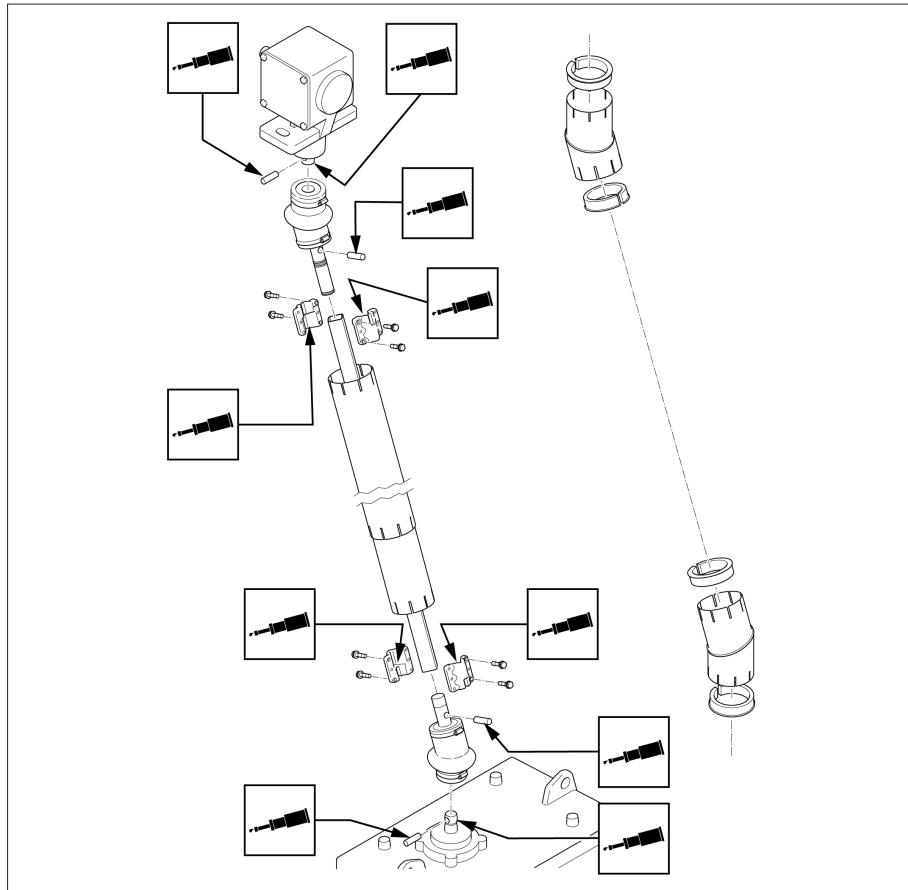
Grease the coupling bolts, coupling brackets and ball heads.
